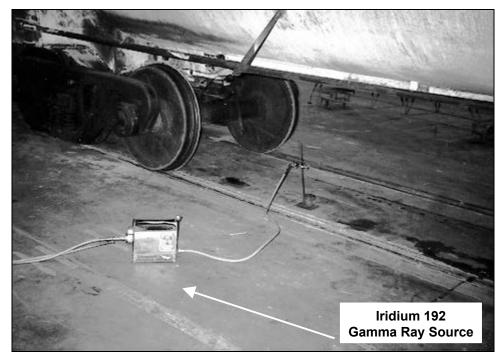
Gamma Ray Source Location for Transverse Butt Weld Inspection with Source at the Exterior of the Tank
